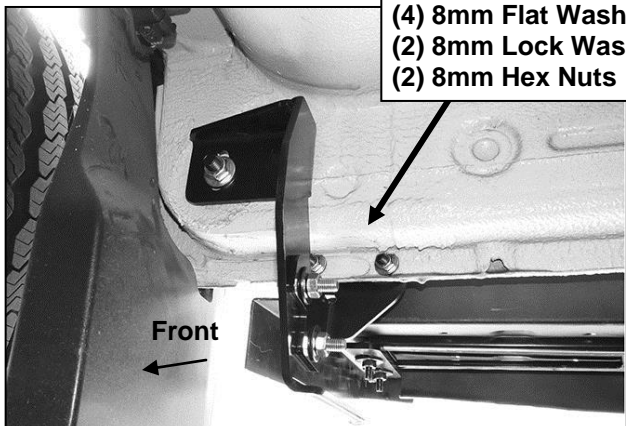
Mark location of each Support Bracket onto pinch weld before drilling
